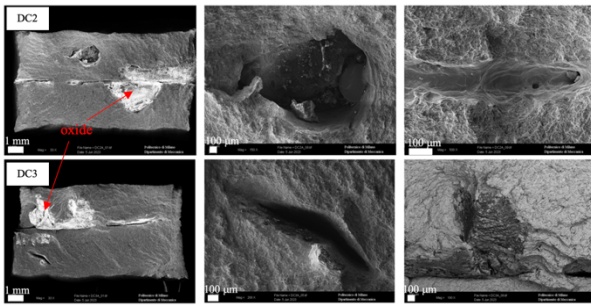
fracture surfaces of the two DC butt weld specimens failed in the WZ observed at the SEM
